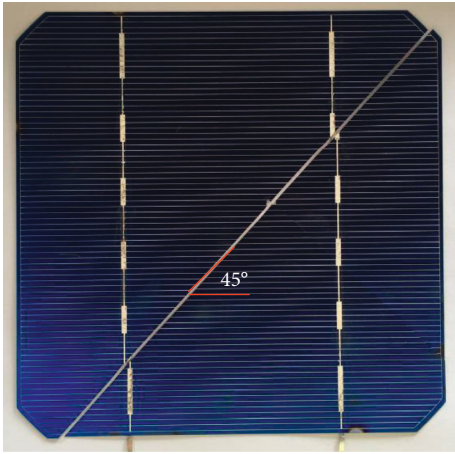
The fracture photograph of the solar cell after the three-point bending test.
